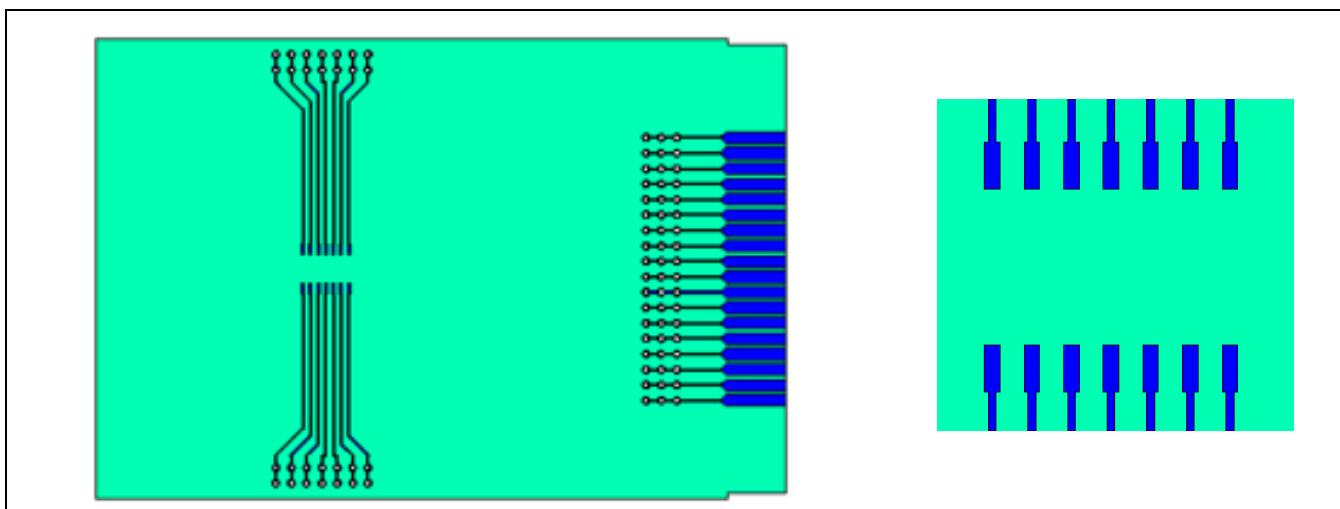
PCB reference layout (according to JEDEC 1s0P)
